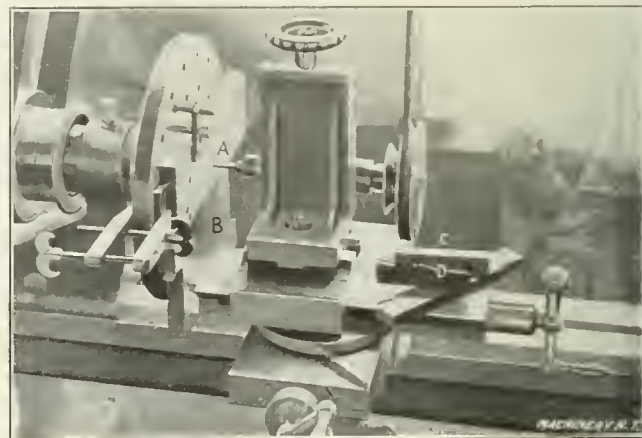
Method of Laying out and Boring Jig Plates in the Elgin Tool Works
